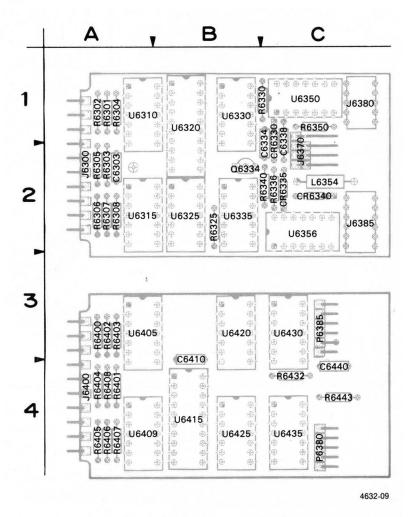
A32 - Word Recognizer board (top), and A33 - Word Recognizer board (bottom).
